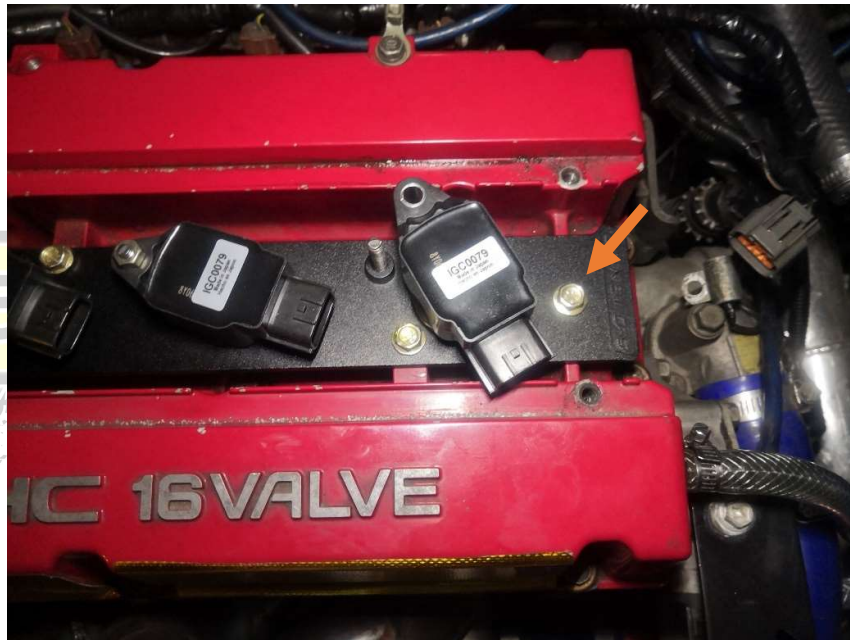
Fastening the Mounting Plate to The Valve Cover
